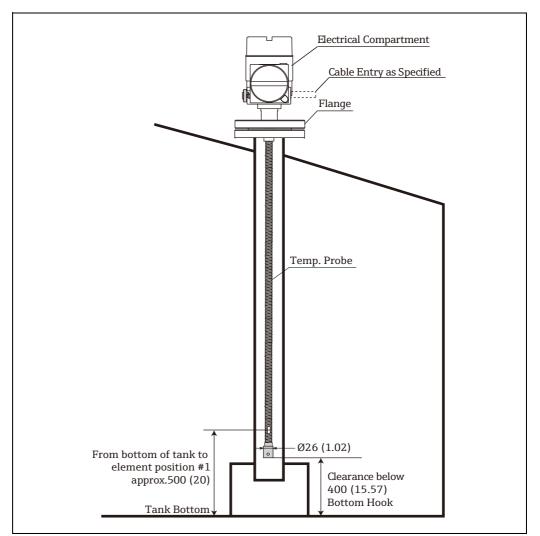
Stilling Well, Unit of Measurement: mm (in)
